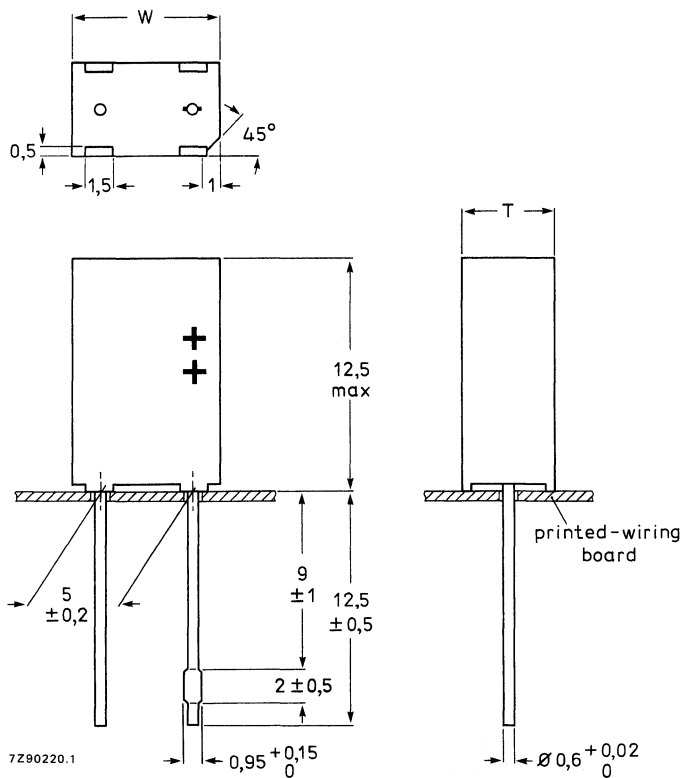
Style 2; see Table 1a for dimensions T and W.
